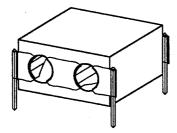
Pins can be added to the Matrix Transformer Module, for insertion into a printed wiring board.
